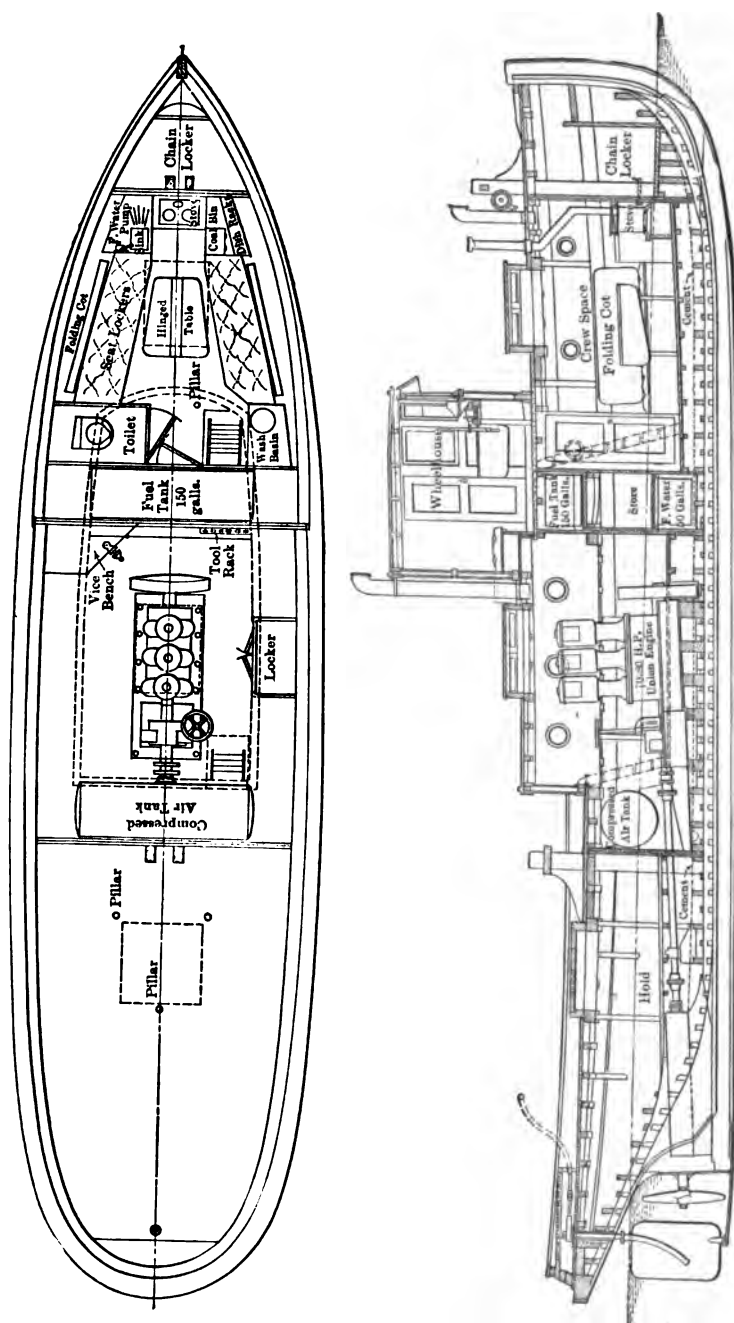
PLAN AND SECTION OF CANNERY TENDER.
